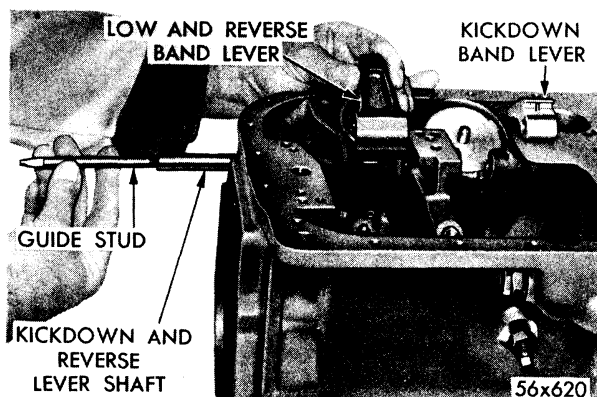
Removal and Installation of Kickdown and Reverse Lever Shaft
